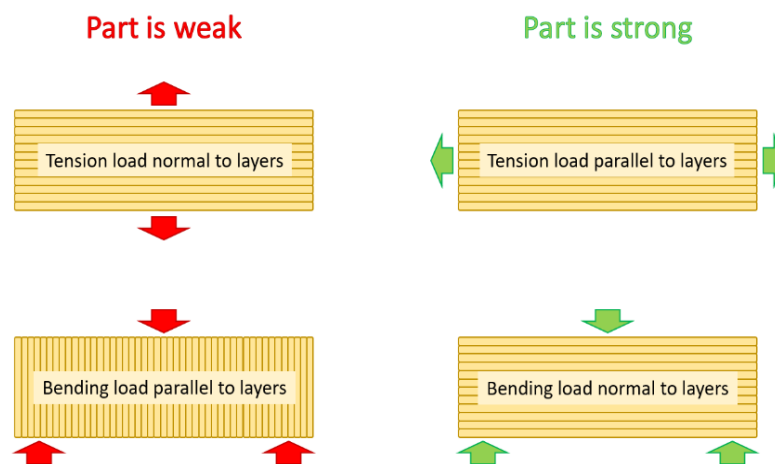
Mechanical anisotropy in 3D printed parts.
